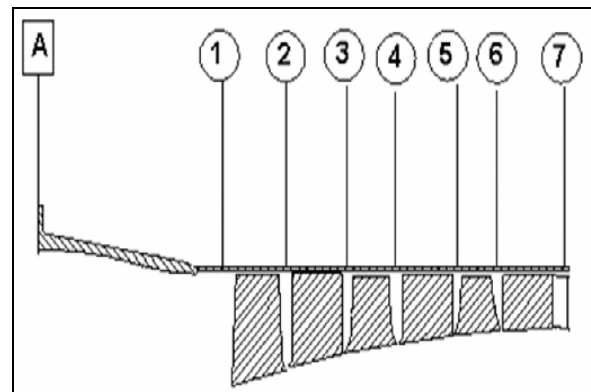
Schematic drawing of compressor axial cross-section with measuring stations.
